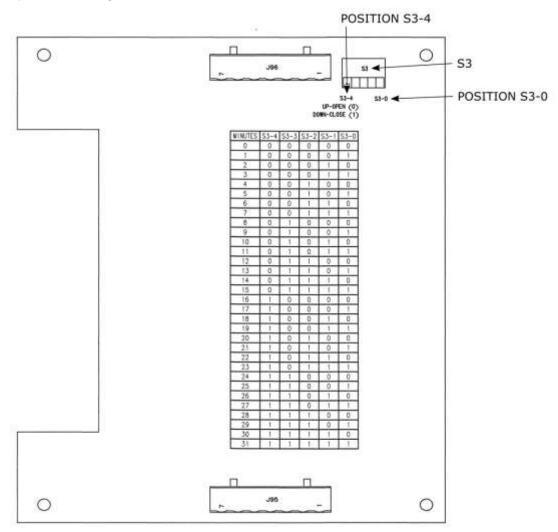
Transfer Module Assembly, A80468, S3 Switch Position
